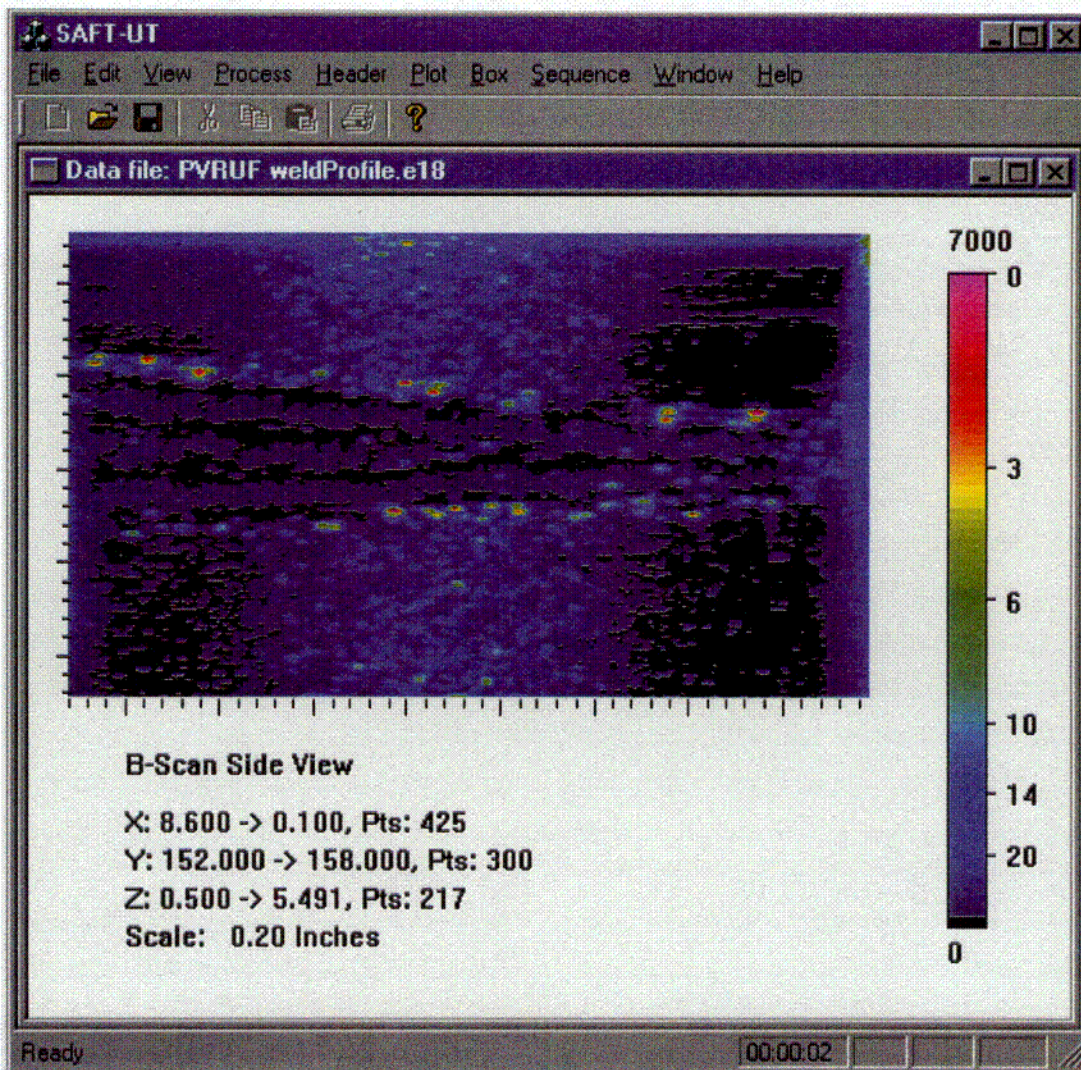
Side View of Weld-Normal Ultrasonic Test Showing Weld Profile as Evidenced by Small Flaw Indications
